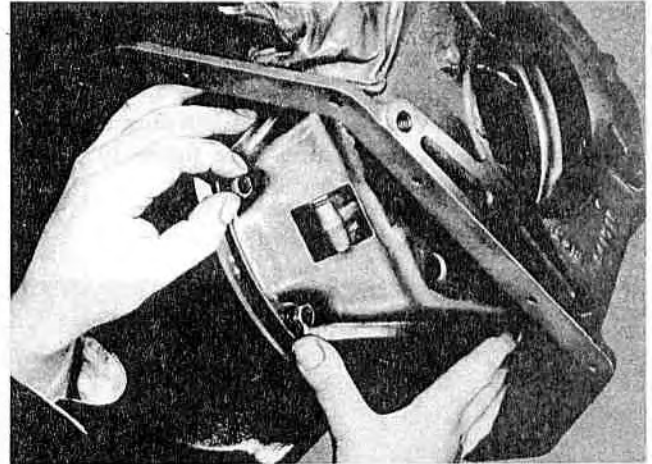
Installing the Clutch Pressure Plate and Driven Plate
